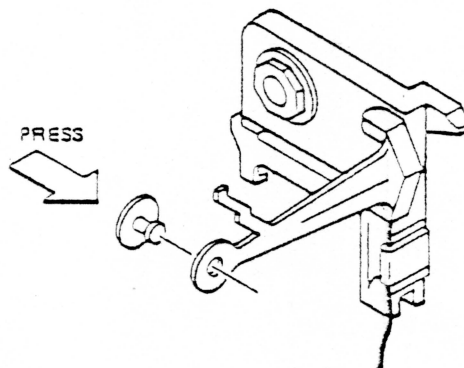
HEAD LOAD BUTTON REPLACEMENT
